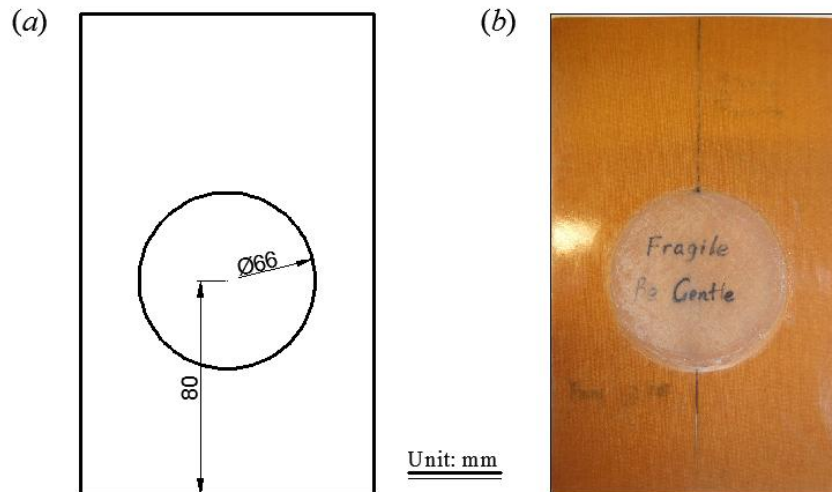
(a) the geometric design of the 2 inch diameter YBCO sample holder; (b) the sample holder with YBCO sample sealed inside.
